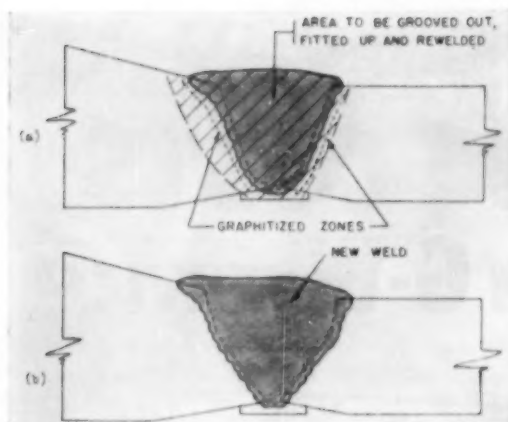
Sketch illustrating procedure for complete (a) grooving out and (b) rewelding of joint with graphitization on both sides of the weld
